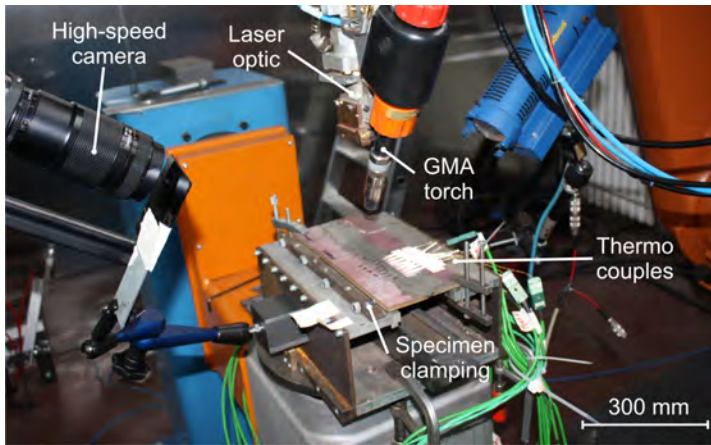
Experimental setup of laser GMA hybrid welding experiments
